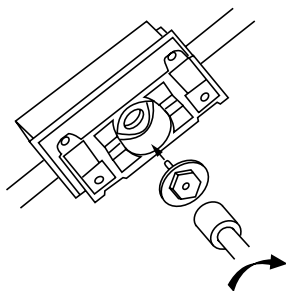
(12) Drilling a Hole for Core Probe on the Coaxial Cable
